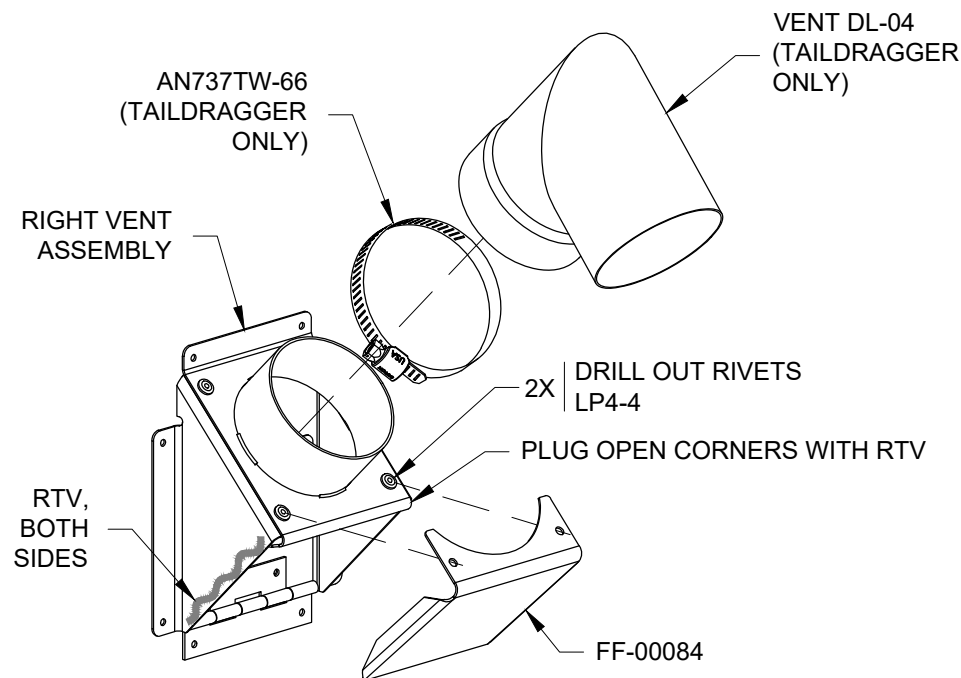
MODIFY RIGHT VENT ASSEMBLY
